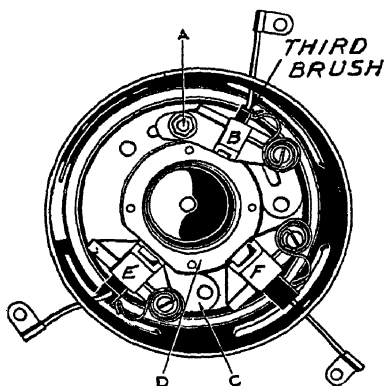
End-housing and brush holder assembly for Ford generator.
